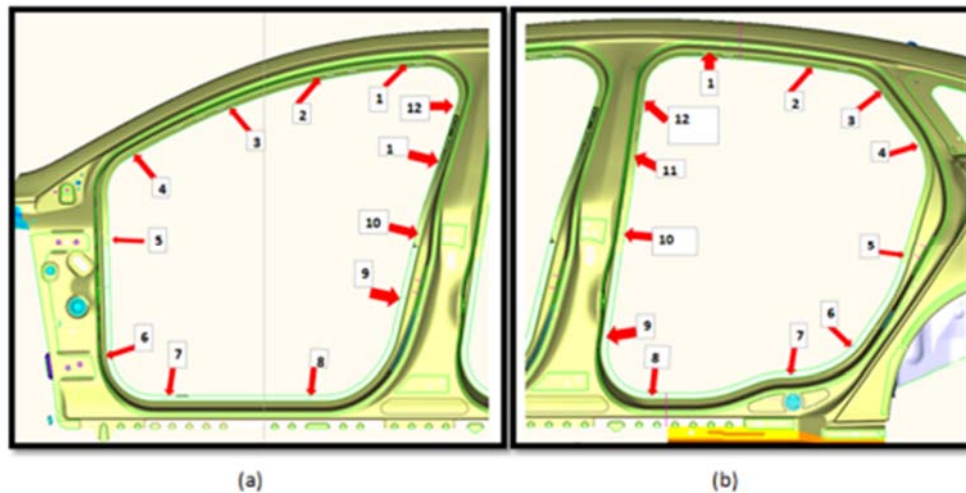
The Seal Gap Measurement Points, (a) is the Front Door and (b) is the Rear Door
